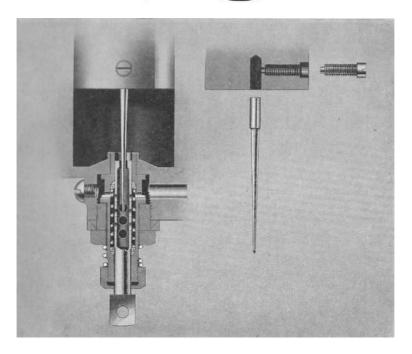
Carburettor Jet Assembly, Piston, and Needle
